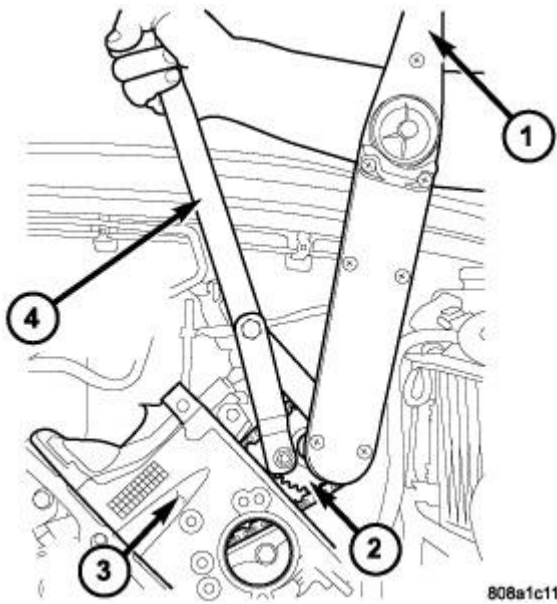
Removing/Installing Left Side Camshaft Sprocket Bolt
